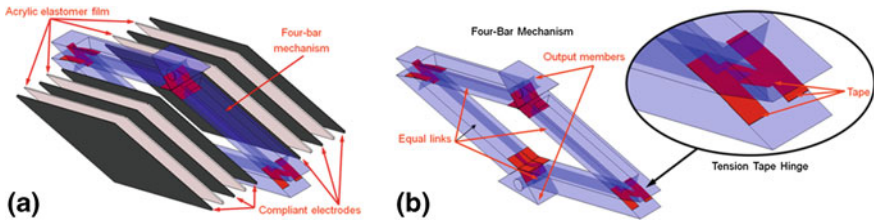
Lozenge actuator CAD drawings: a actuator exploded view and b four-bar mechanism
